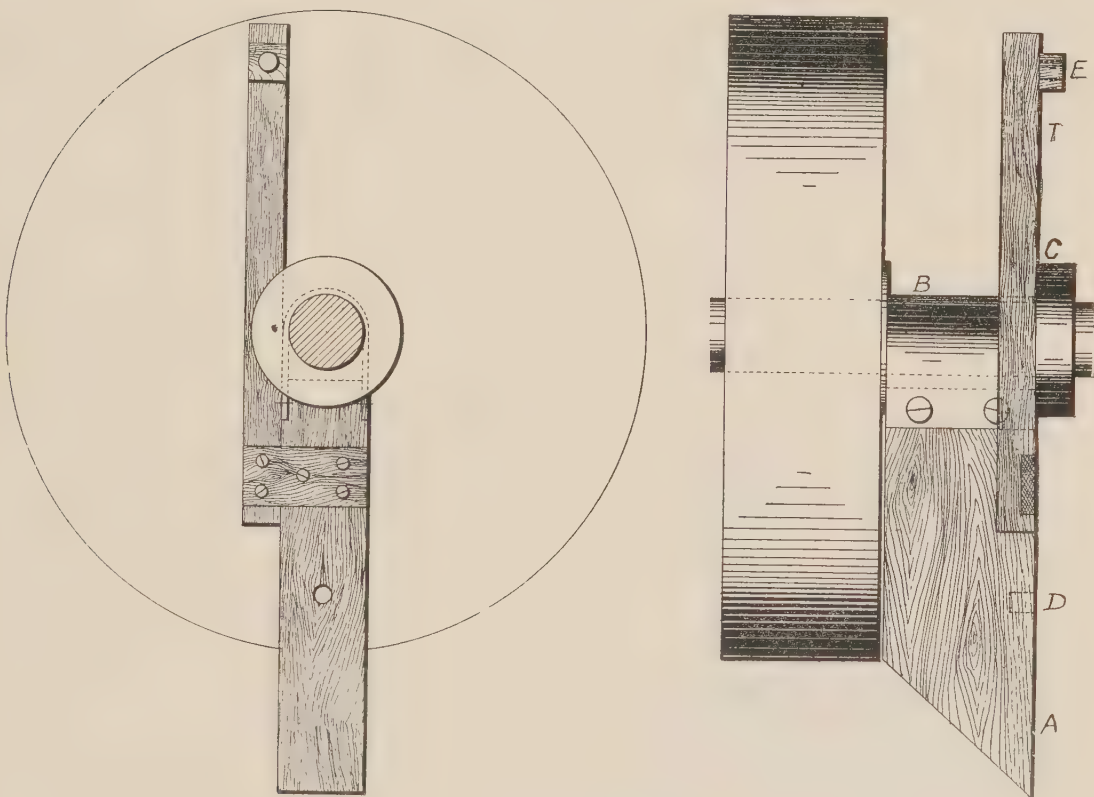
“CAPELLO” MOUNTER SUPPORTED ON SHAFT.
